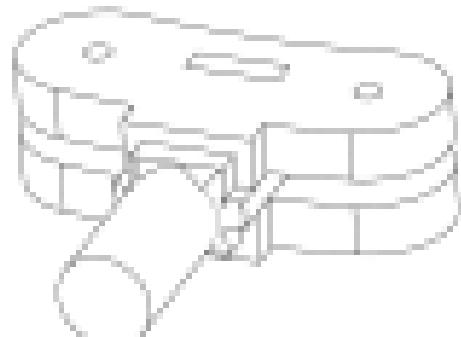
Servo Bracket Middle Ring Assembly
